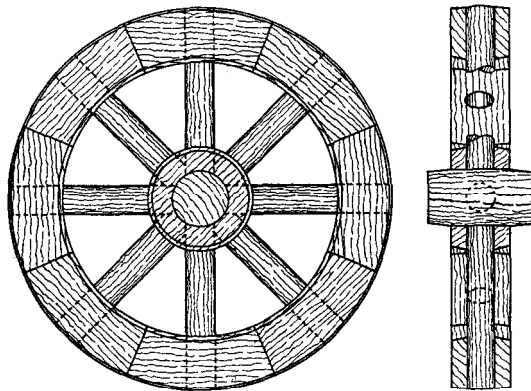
Geometrical principle of the fabricated mu&spoked method
